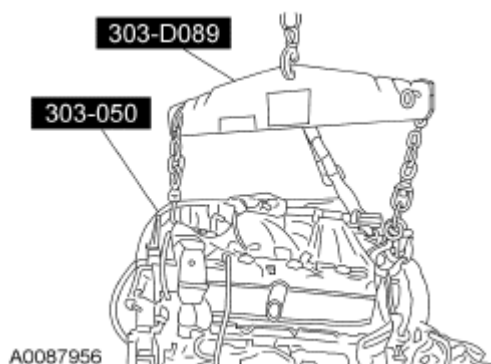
Removing Engine From Engine Stand Using Special Tools (303-050, 303-D089)
